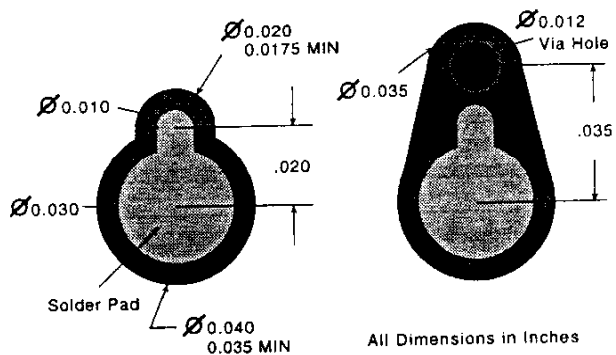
Tear Drop Shape Pad for X-Ray Viewing
